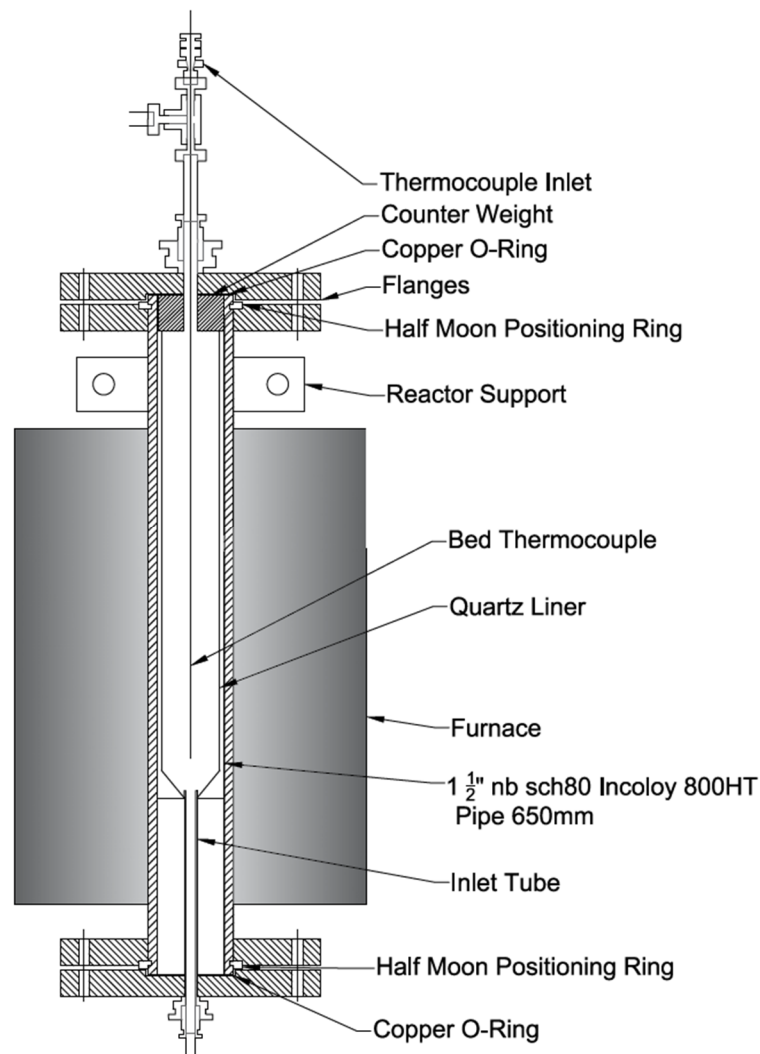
CAD drawing of the reactor body design and details of the major components.
